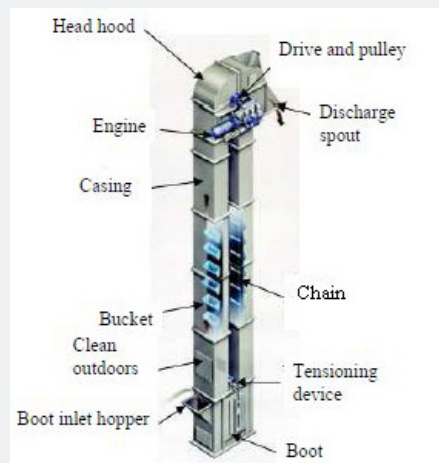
Bucket Elevator Type 250 with an Auxiliary Rotating Motor with a Power of 10KW.
